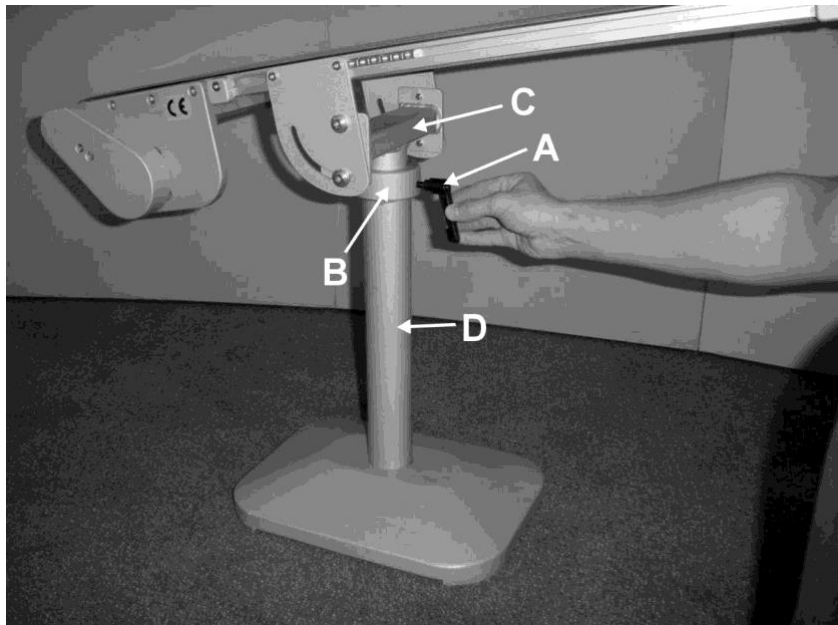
Single-legged support made of steel with aluminium base plate, height adjustment
